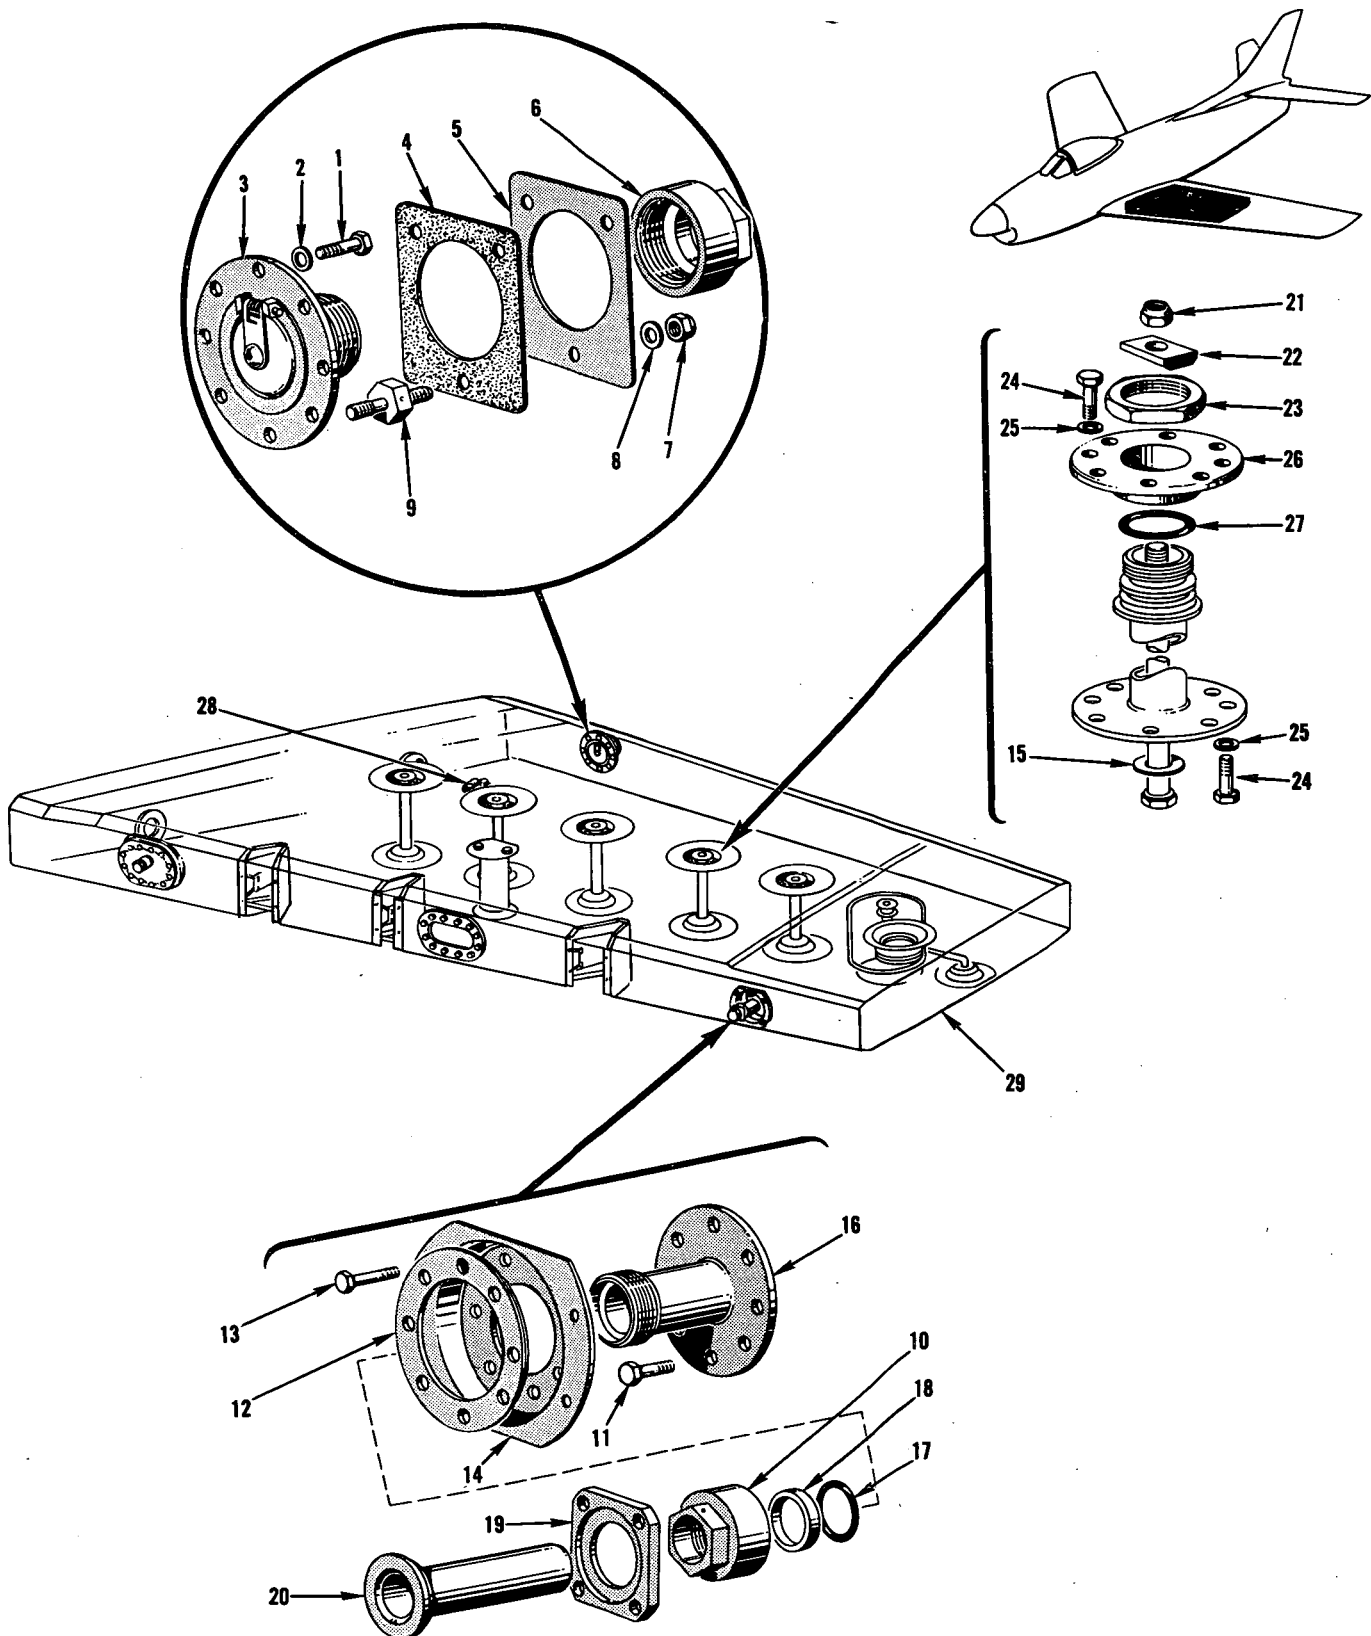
OUTER WING PANEL FUEL TANK INSTALLATION
